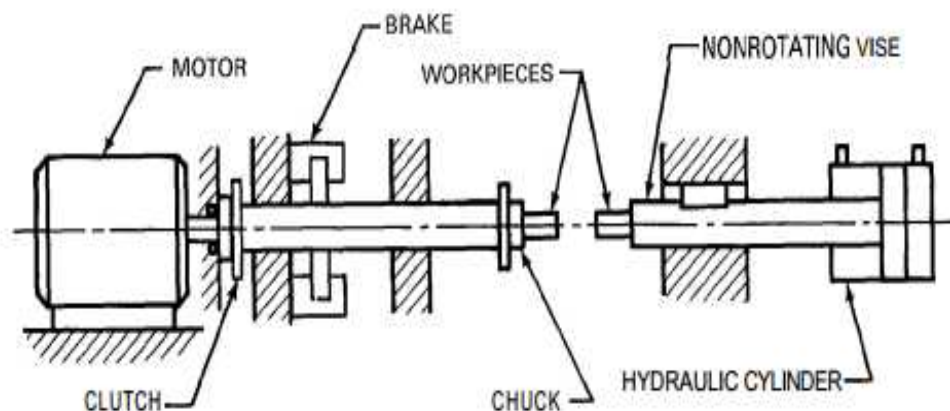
Basic arrangement of a direct drive welding machine (O'Brien, 1997)
